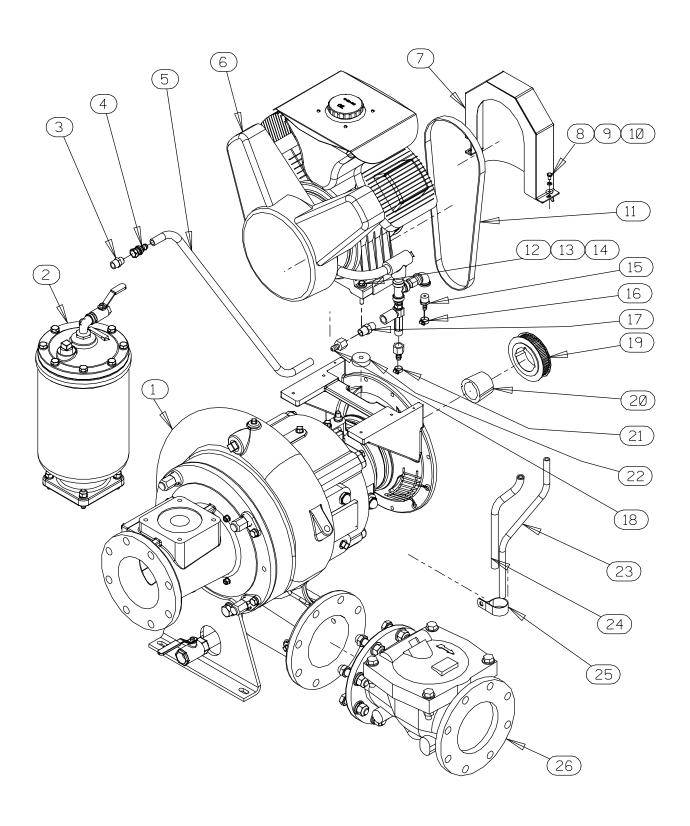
PA6D60C-B-(E50) Pump End Assembly
